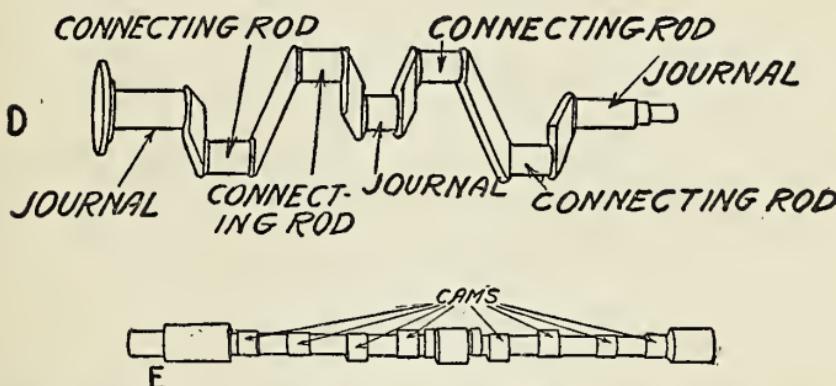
D. A four-cylinder crank shaft. E. A four-cylinder cam shaft.
